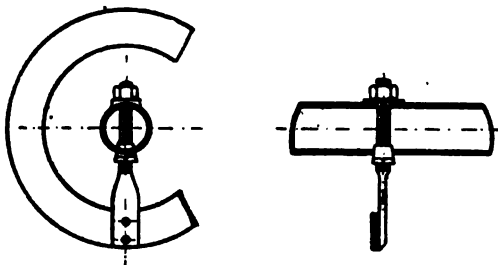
Method of Fixing Spiral of Conveyor to Spindle.
